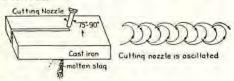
A successful cast-iron cutting technique requires a slight side-to-side motion of the blow-pipe.
